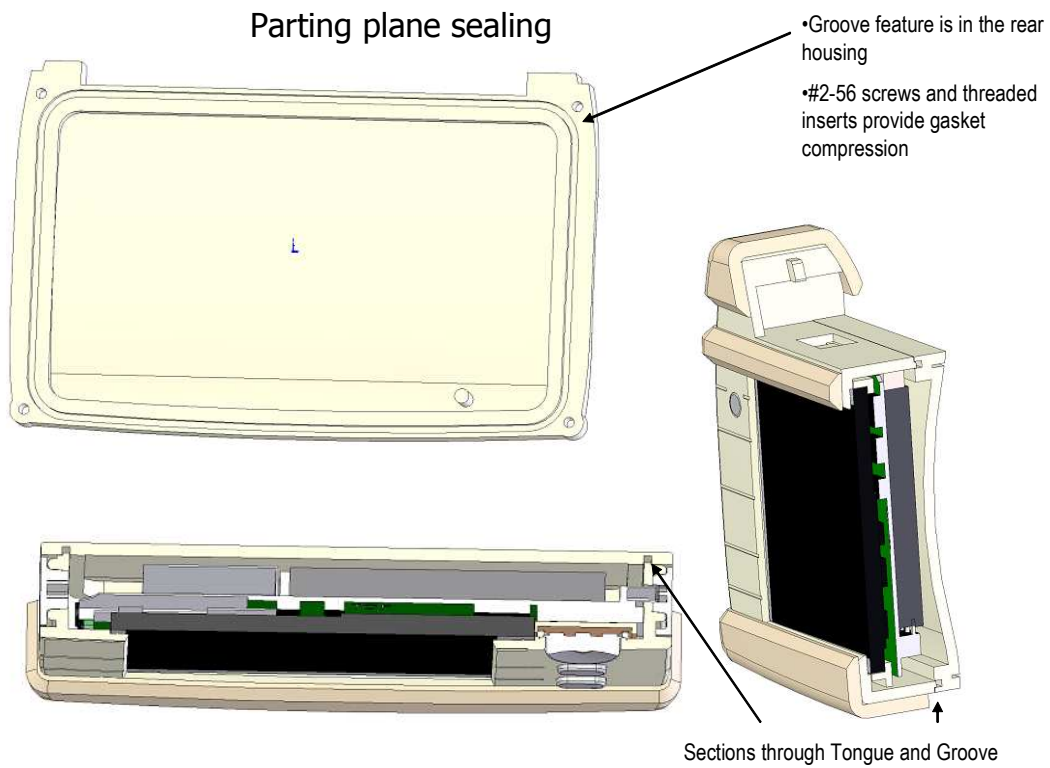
Design provisions in packaging for parting plane sealing of Spiral 3.
